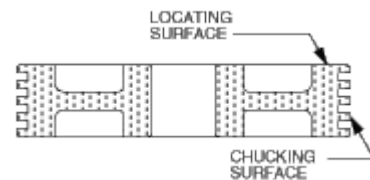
The part in Figure 3-4 after forging and trimming operations and prior to machining.
